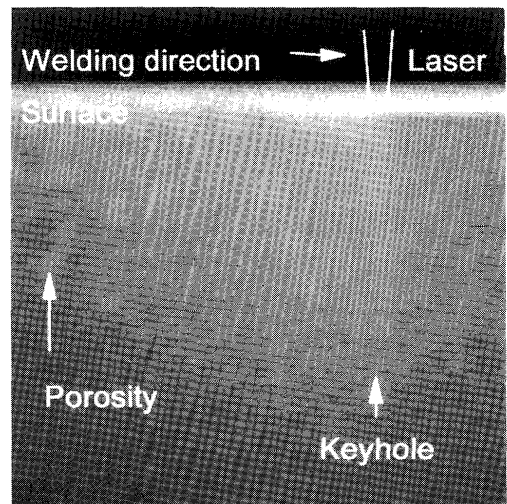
X-ray transmission observation photo during CO₂ laser welding of A5083 alloy at P₁=10 kW, v=25 mm/s, and f_d=0 mm in He gas, showing keyhole, bubbles and porosity formation.
